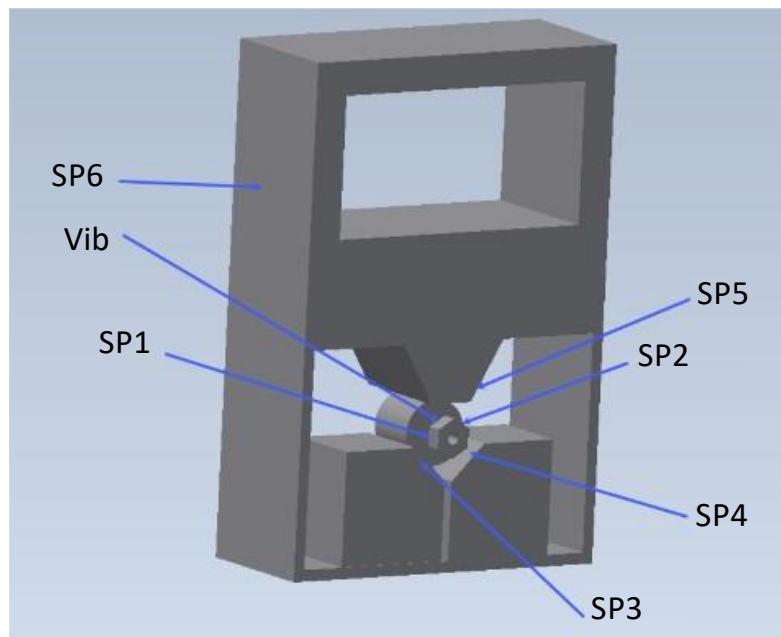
, Test machine sensor location layout. SP<sub>x</sub> refers to sensor position x.
